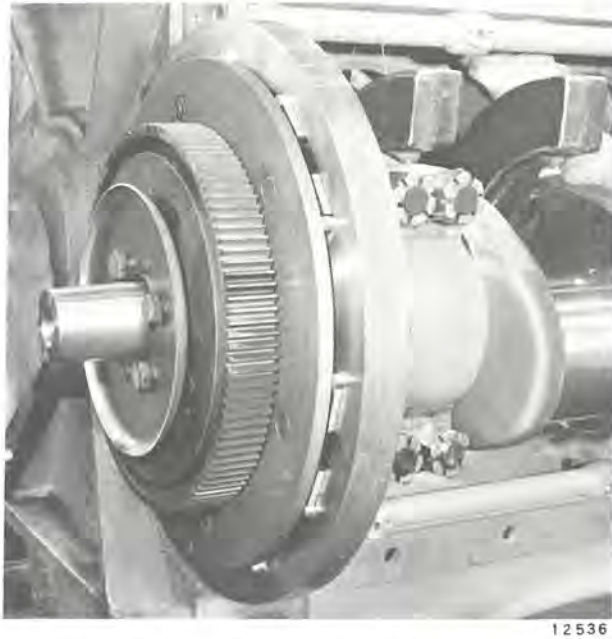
Harmonic Balancer And Accessory Drive Gear
